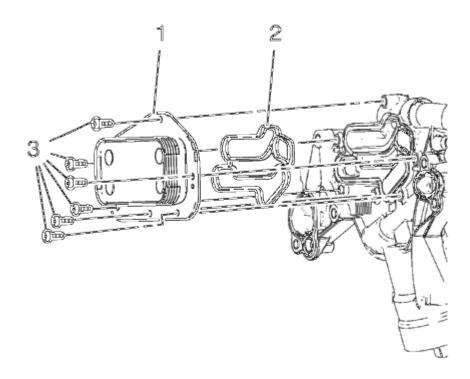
Engine Oil Cooler Courtesy of GENERAL MOTORS COMPANY
